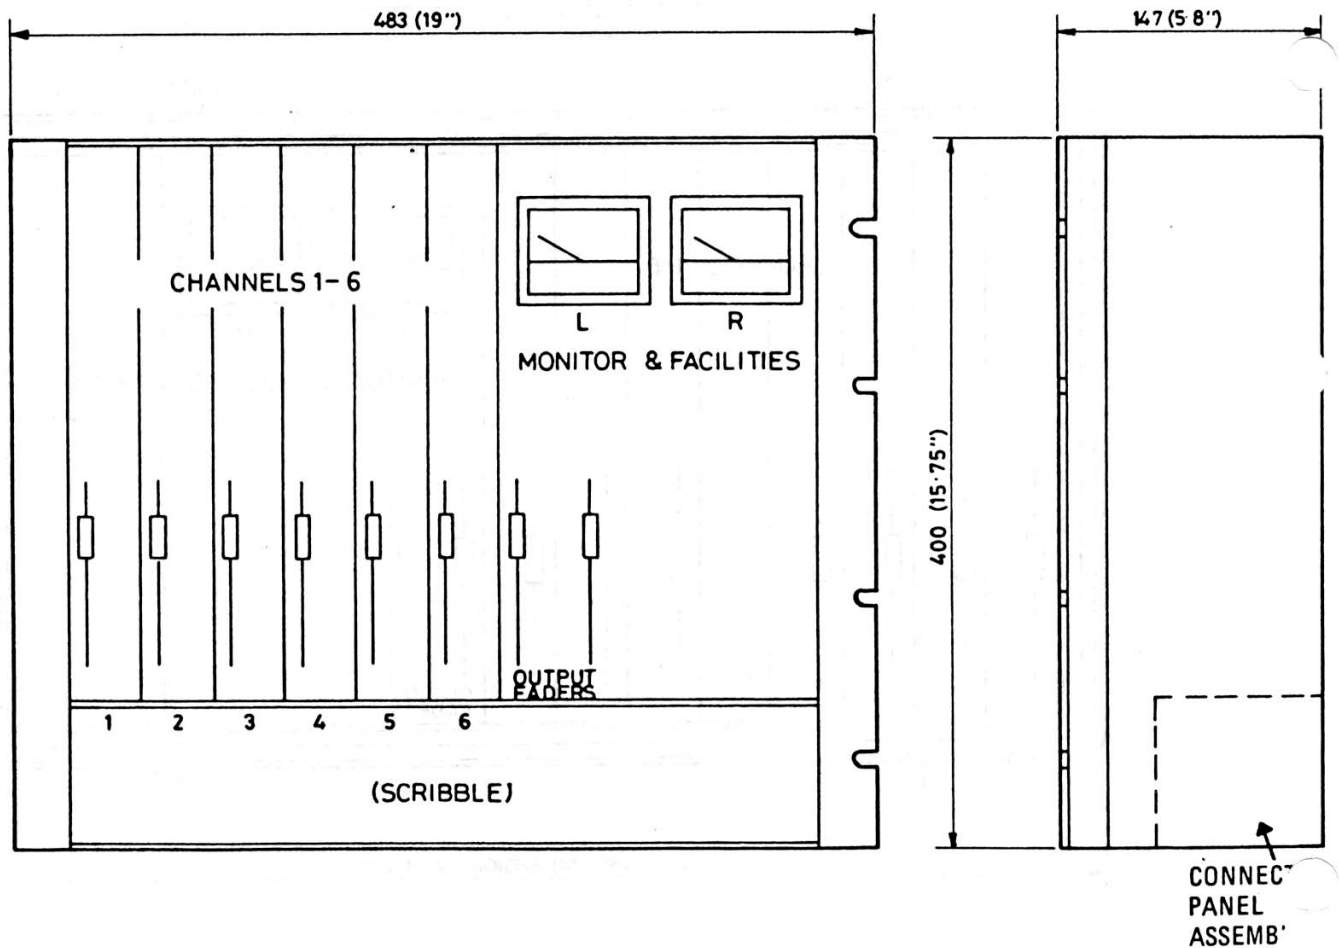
5422 - R CONSOLE LAYOUT (MR60076)
